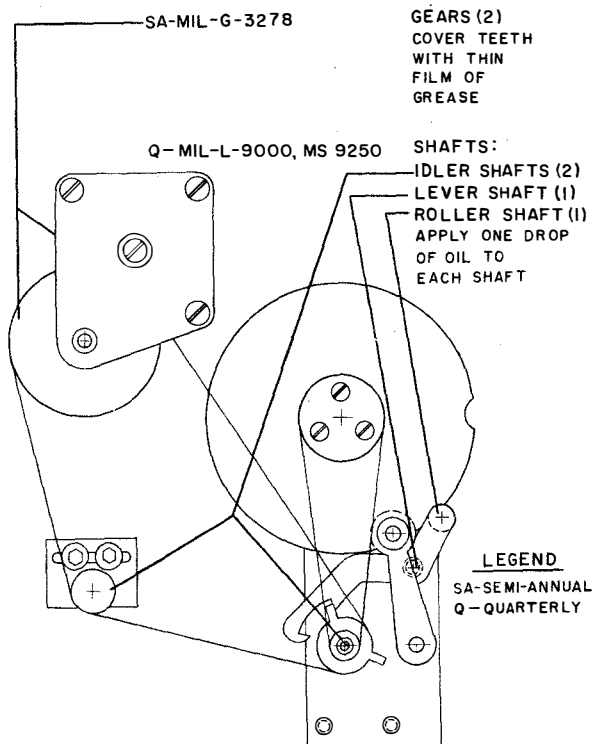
RFA, IPA Dial Assembly, Lubrication
